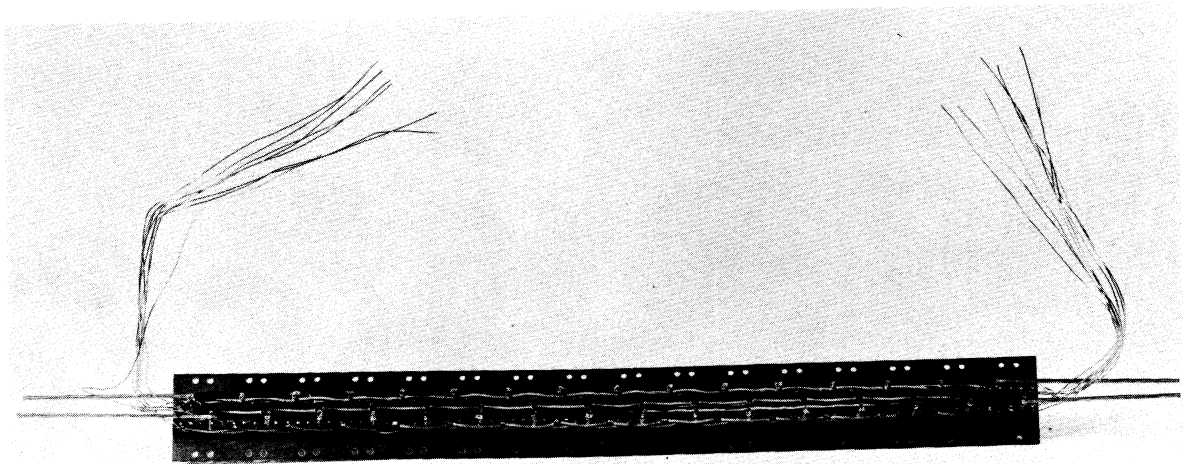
REAR PLATE OF HORIZONTAL AIR DUCT
